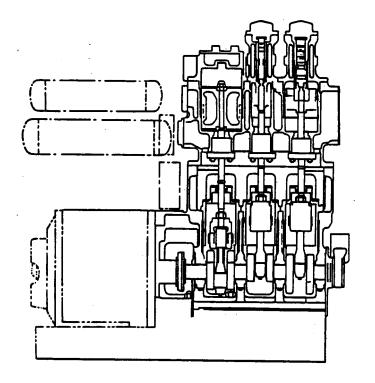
Oil-Free HP Air Compressor Cylinder Arrangement
